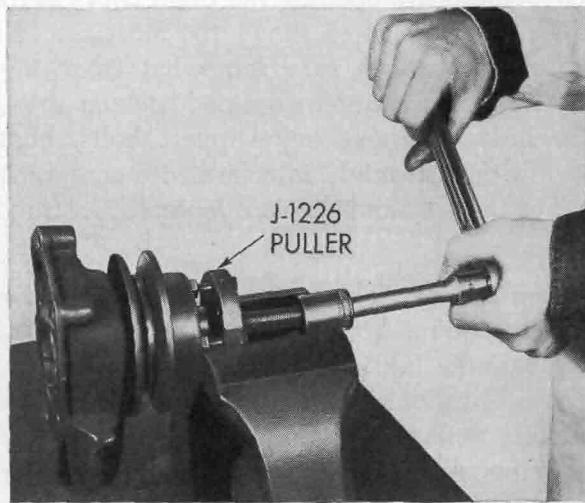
Using puller to pull fan pulley from pump shaft. (*Chevrolet Motor Division of General Motors Corporation*)
